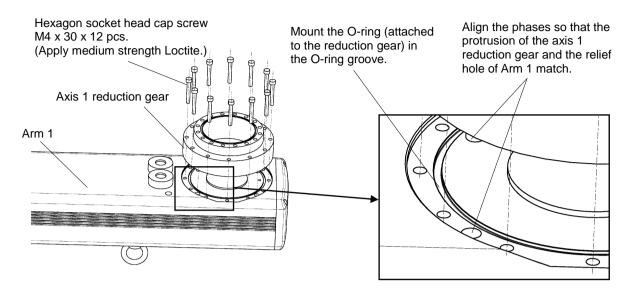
Mounting axis 1 reduction gear (KHL-500, KHL-600, KHL-700)
